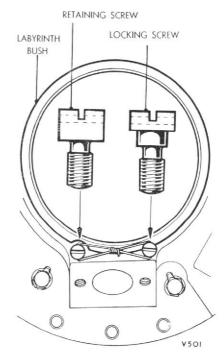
Labyrinth bush retaining screws and method of wire locking.
